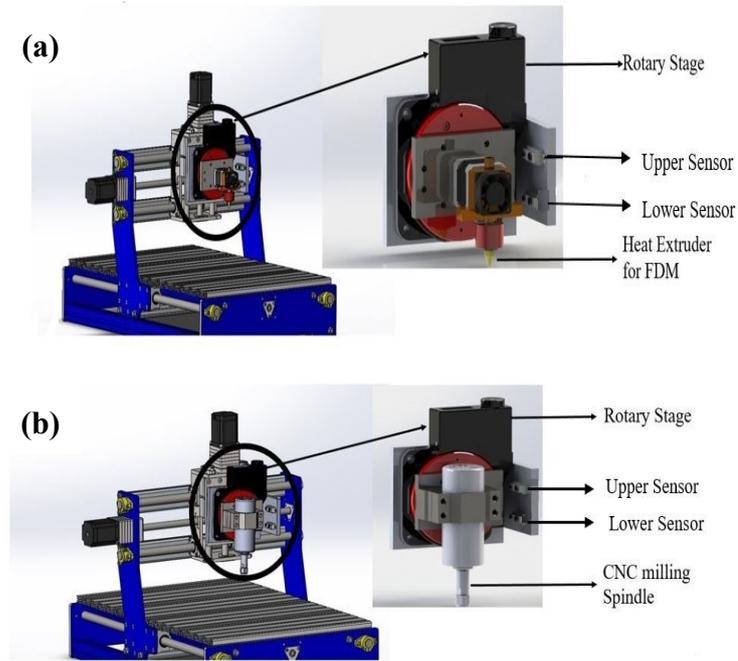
CAD model of the developed hybrid system combining Fused Deposition Modelling and Abrasive Milling; (a) shows mounting of the heat extruder and (b) shows the mounting of the milling spindle.
